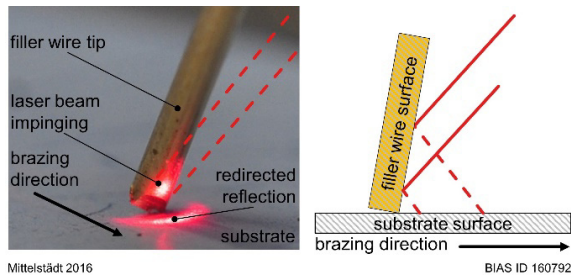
Close-up of the filler wire tip illuminated by the pilot laser (left); sketch of the optical path of the laser beam (right).
